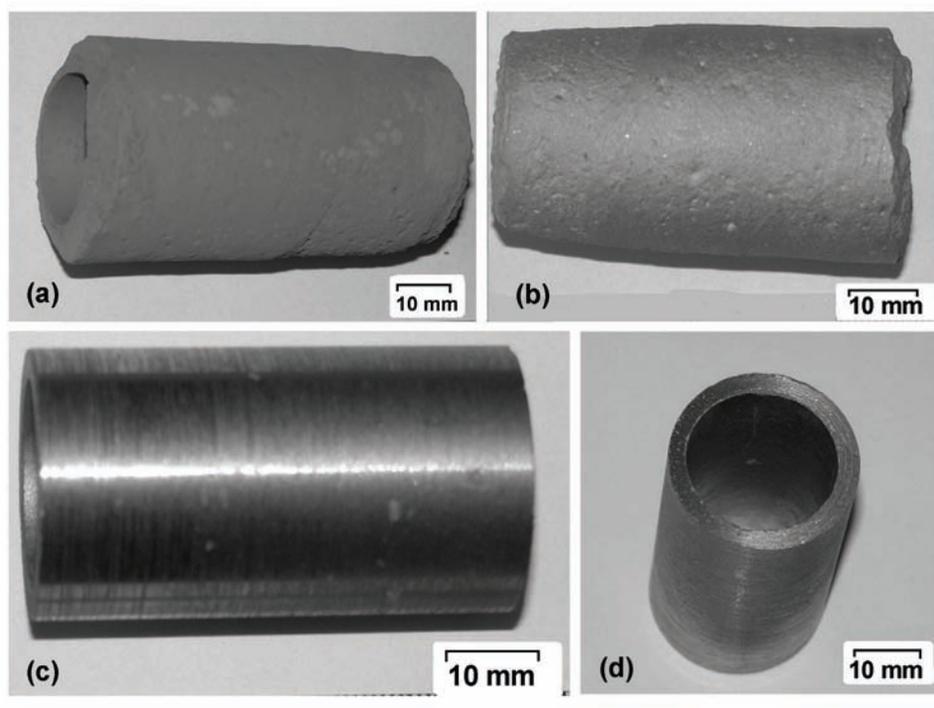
TZM tube produced by mechanical alloying followed by CIP and sintering: (a) Green, (b) Sintered and (c) & (d) Machined
